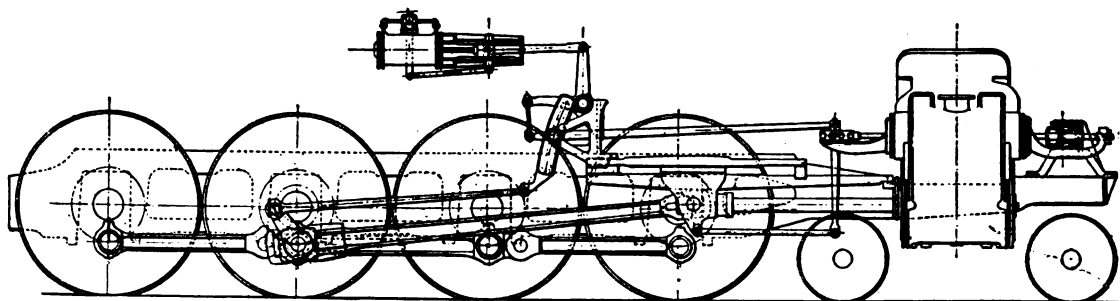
The outside main rods of a three-cylinder locomotive, connected to the third pair or main driving wheels
